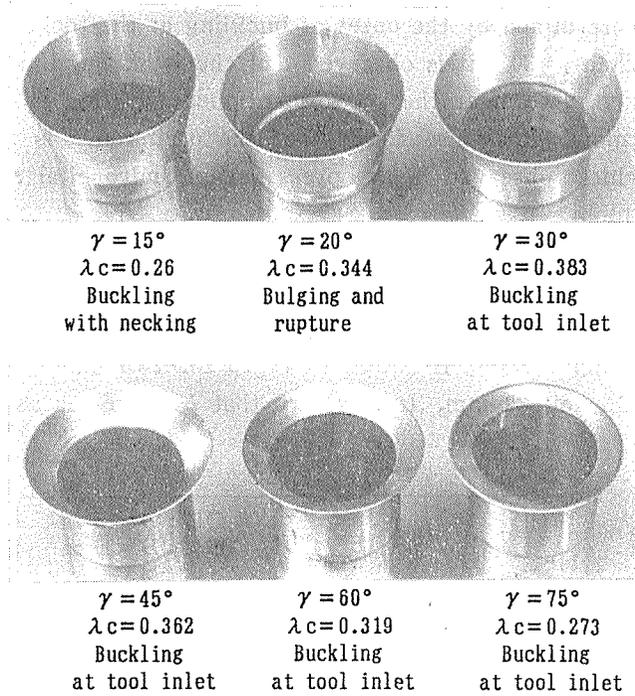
Unfavorable deformation modes in the process of orbital rotary flaring with a cylindrical tool. (Hard copper tube: Outer diameter 35 mm; Wall thickness 0.6mm; $D=15\text{mm}$; $f=0.1\text{mm/rev}$. Lubricant: Pasty molybdenum disulphide)
